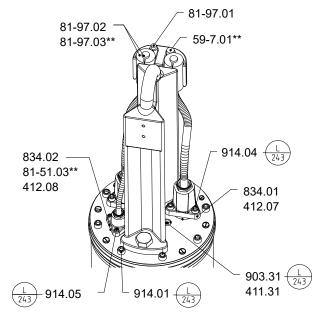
Cable gland and fastening, motors: 70 4 215 4, 47 6 205 6, 40 8 160 8
